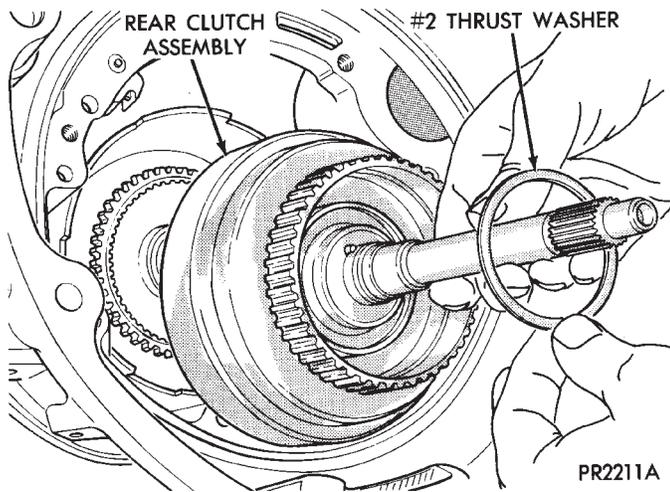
No. 2 Thrust Washer and Rear Clutch
